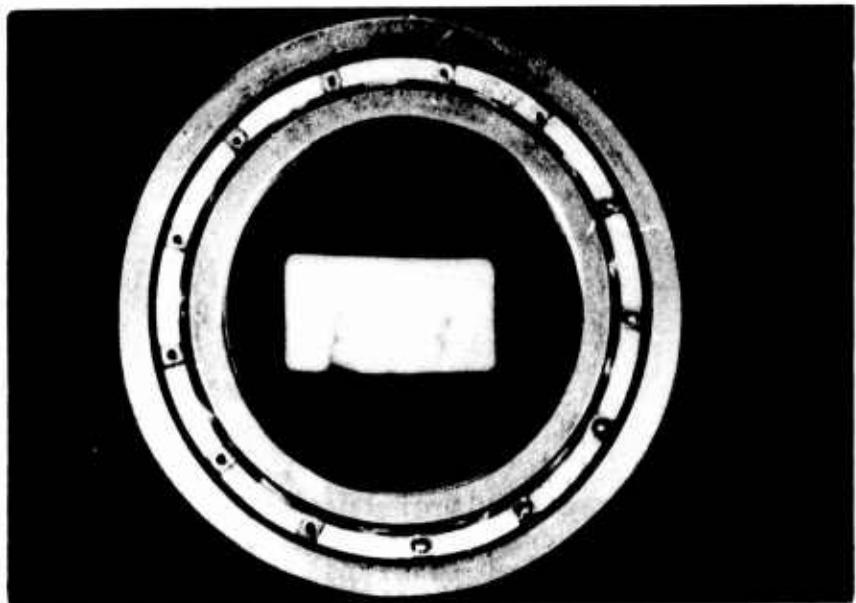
Bearing E13 After Test (Some Rivets Have Been Removed for Disassembly).
